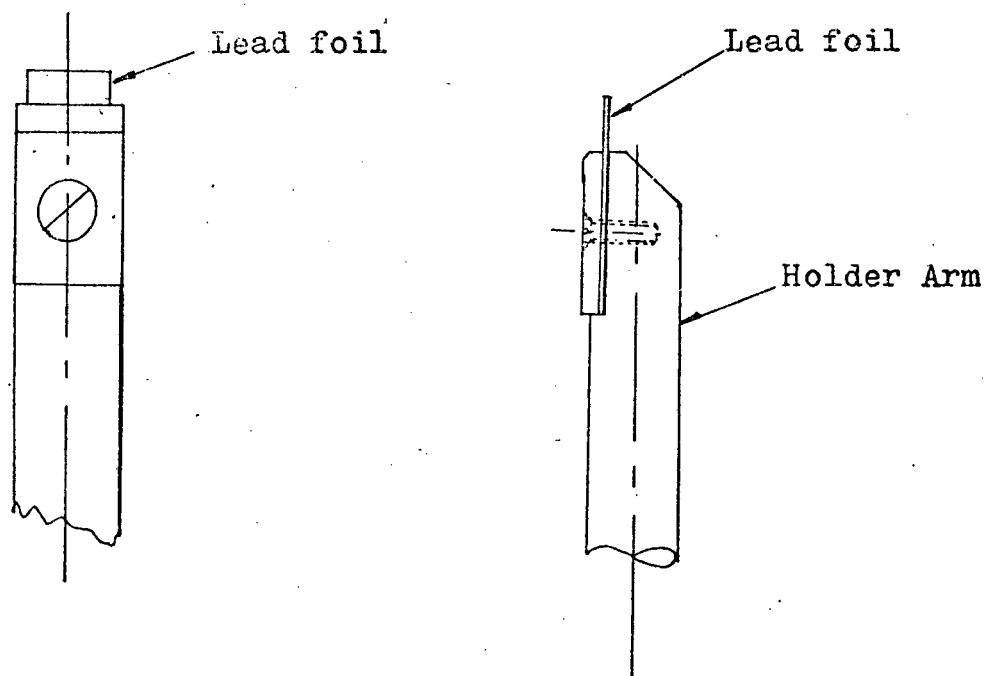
Method of Clamping of Lead Foil into the Holder.
